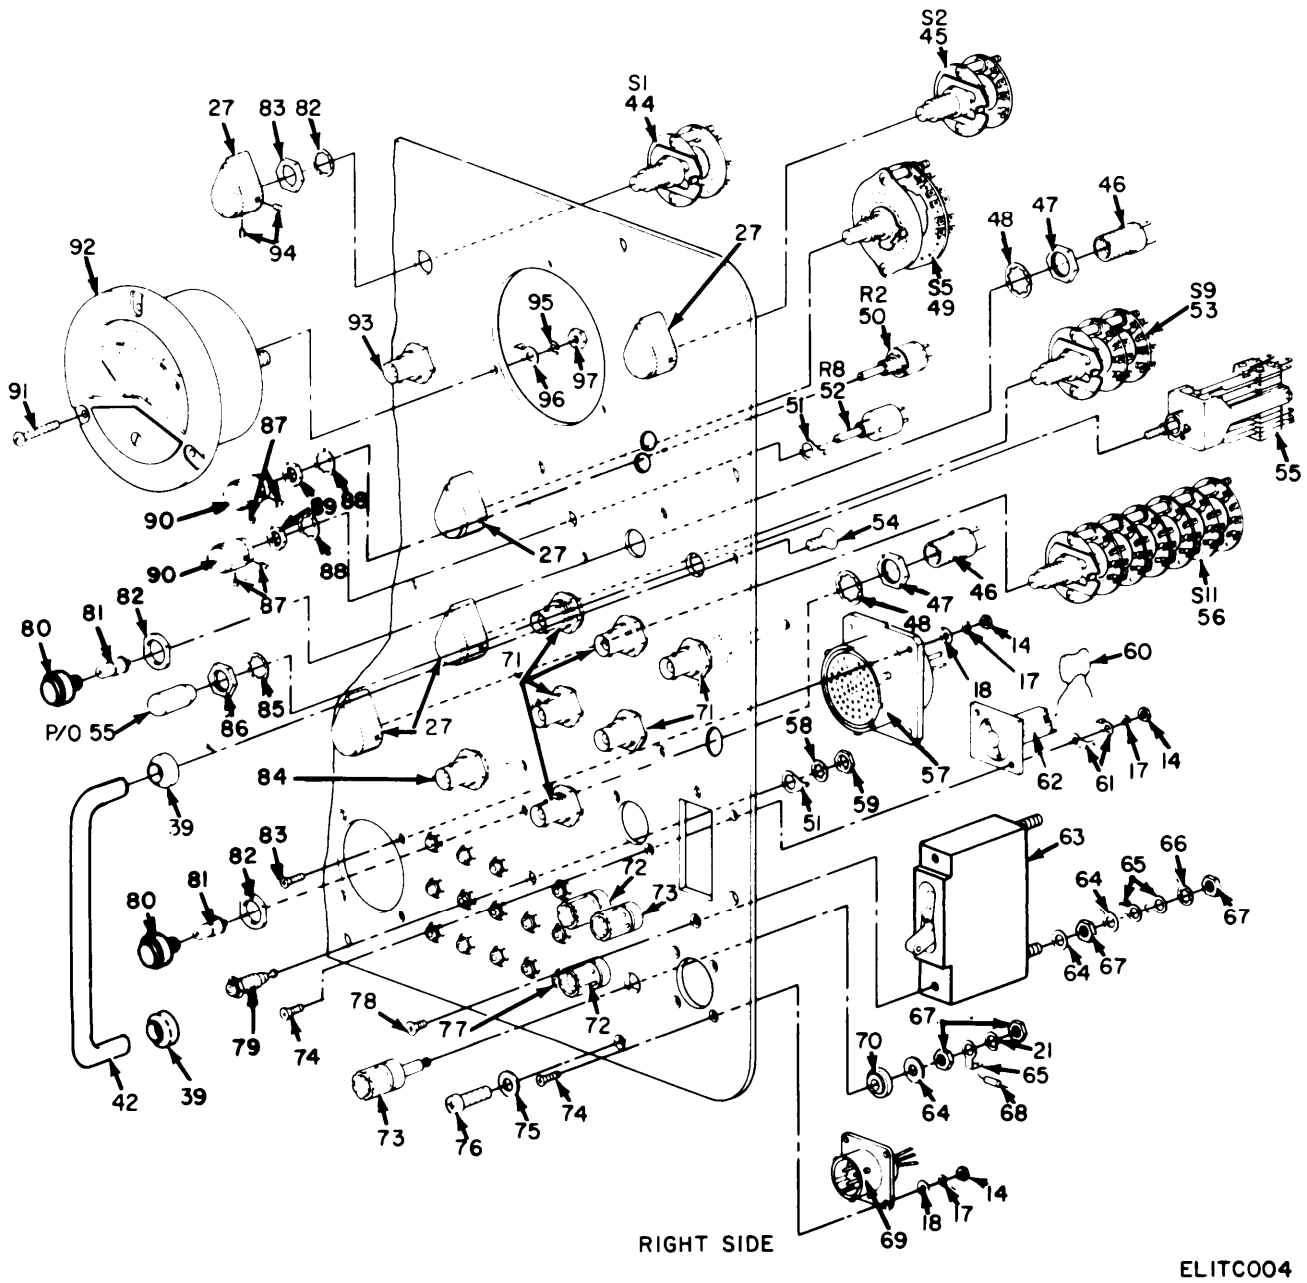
Front Panel Assembly (SMB-504958) (Sheet 2 of 2).
